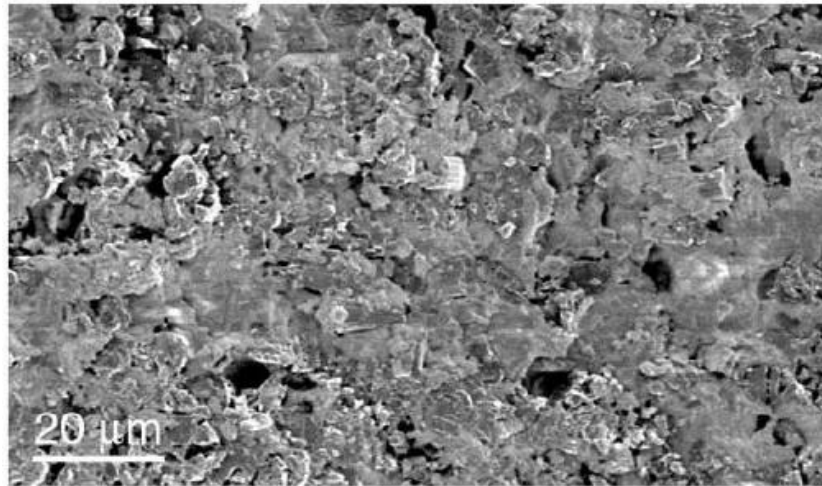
SEM image of the machined surface resulting from the orthogonal cutting of CFRPs at $\theta = 90^\circ$ showing fractured fibres protruding from the machined surface with a cover of smeared epoxy matrix [74]
